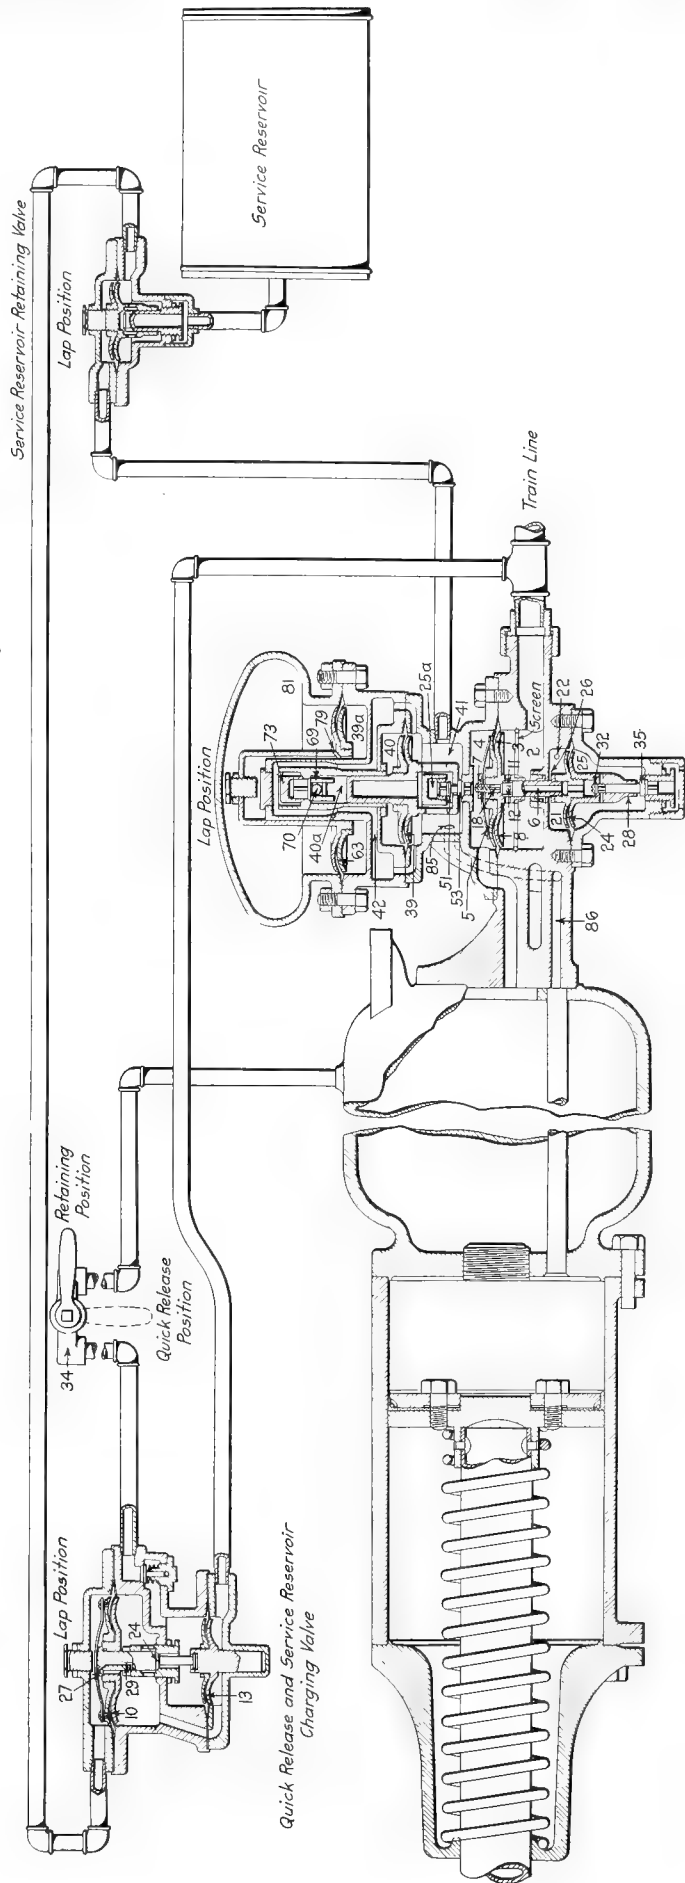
A—Automatic Straight Air Brake Equipment for Freight Cars. California Valve & Air Brake Co.
